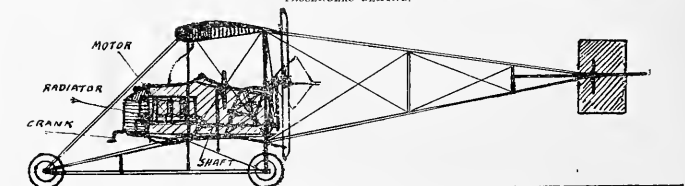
SIDE VIEW OF A CURTISS TYPE WITH THE MOTOR IN FRONT.
